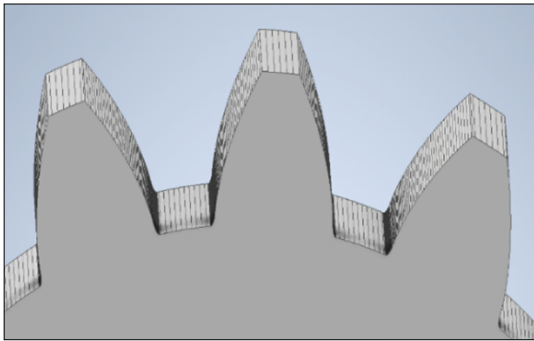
$Z=19, \xi=+0.4$ Involute gear.
